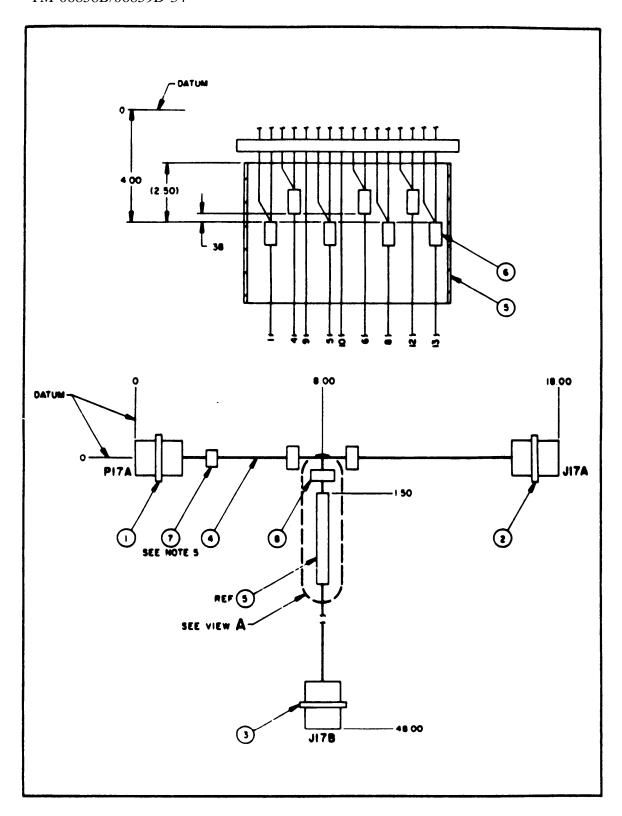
Breakout Cable (Sheet 1 of 2)
